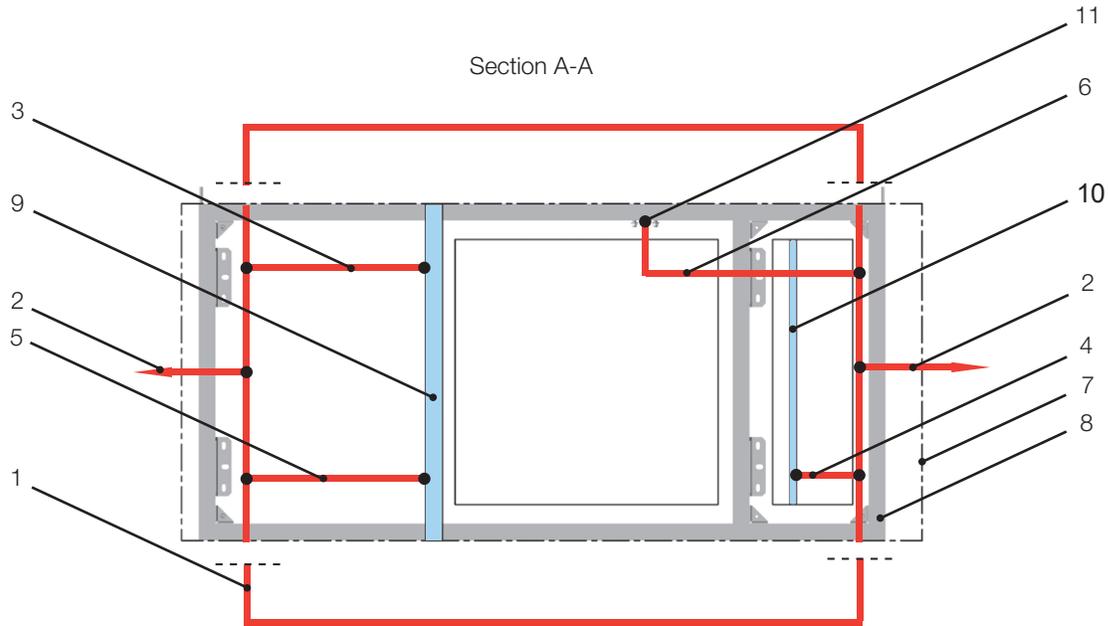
Grounding recommendation, plan view (section A-A of Fig. 11.9.3.1)
